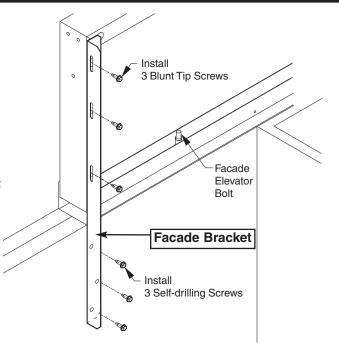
B. Install Dry Goods Facade Bracket (Bump Out with Dry Goods ONLY)
